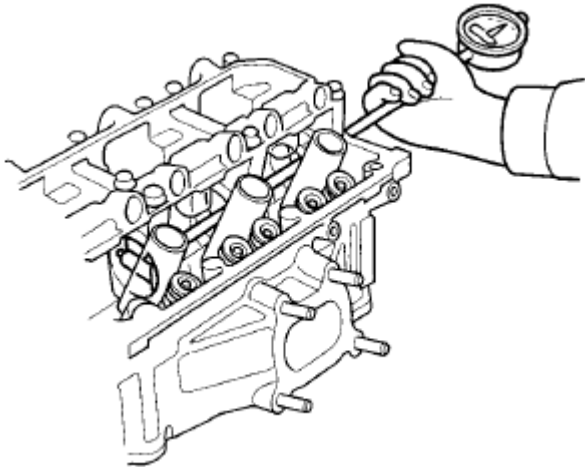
Measuring Inside Diameter Of Each Camshaft Bearing Surface
